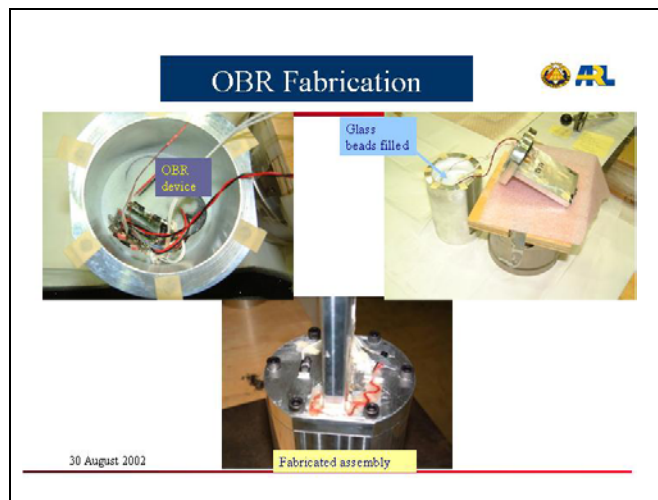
Packaging of the OBR assembly into the OBR housing with glass beads.
